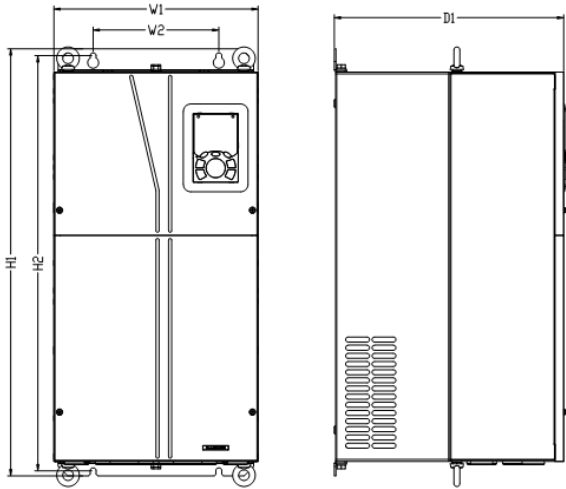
Wall installation diagram of VFDs of 460V 75–110kW
